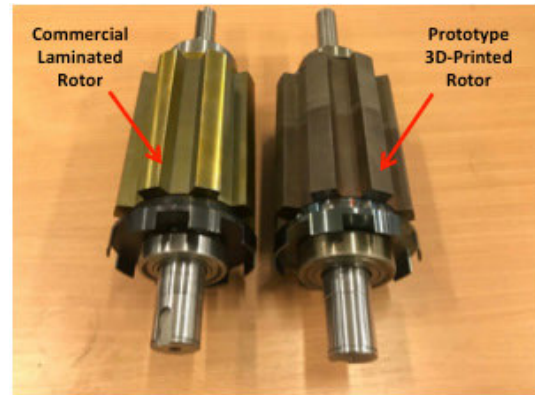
Commercial laminated 8-pole SRM rotor (left-hand side) and identical 3D printed rotor (right-hand side).
